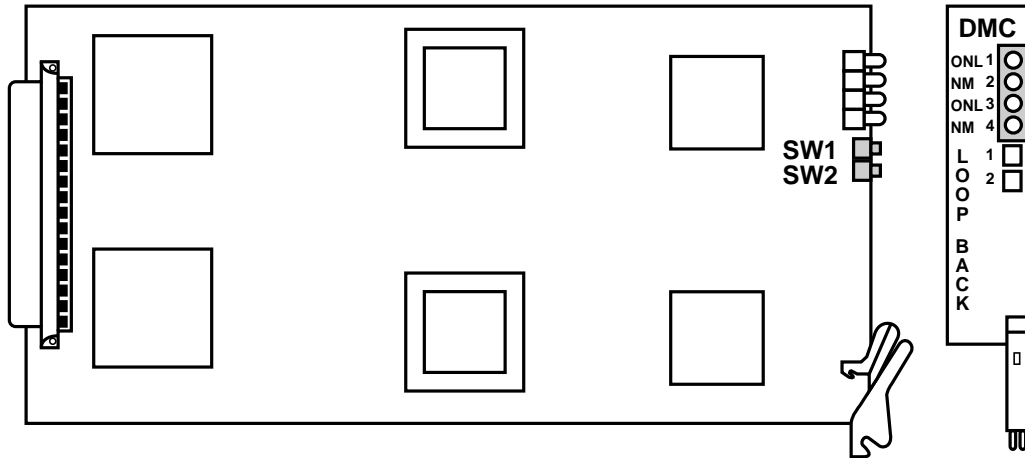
Dual Modem Card Front Plug Assembly.
